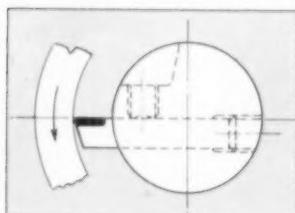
Tool bit inadequately supported, causing spring with resultant chatter. Tool will break.
